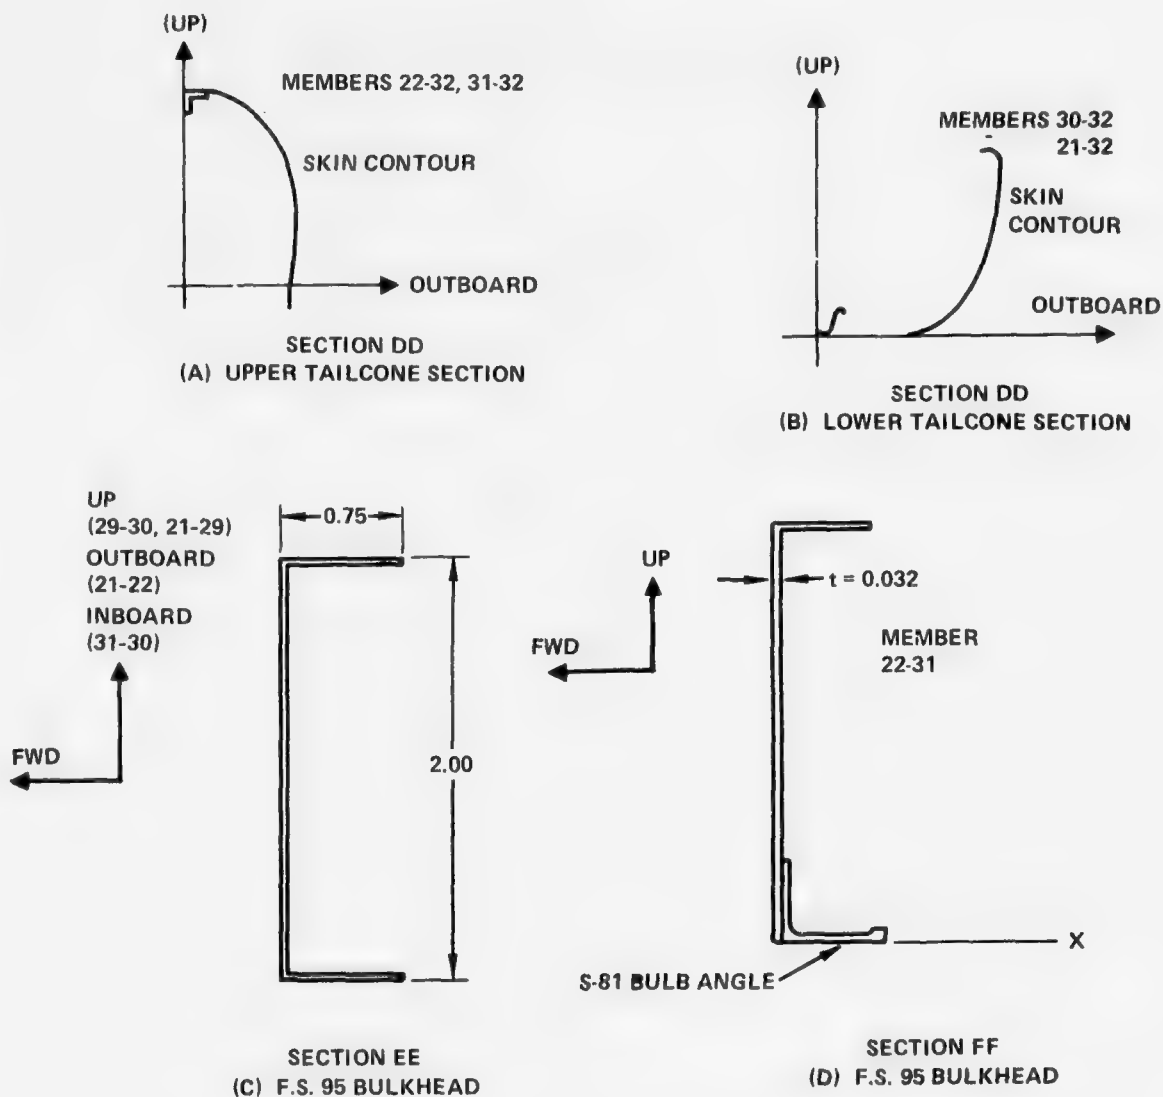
Tail Cone and F.S. 95 Bulkhead Structure Cross Sections
